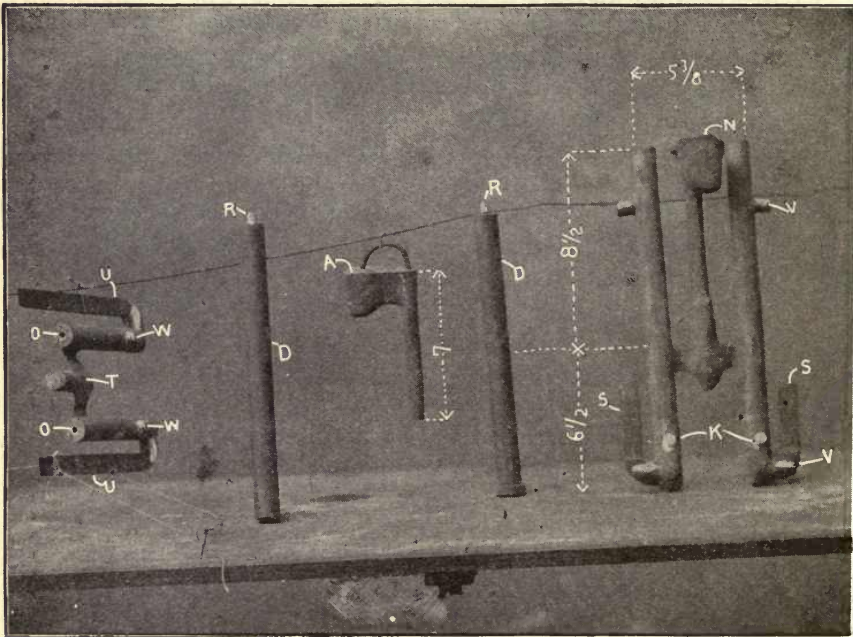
WHIRL-GATE, TEST BAR PATTERNS AND CASTING.
